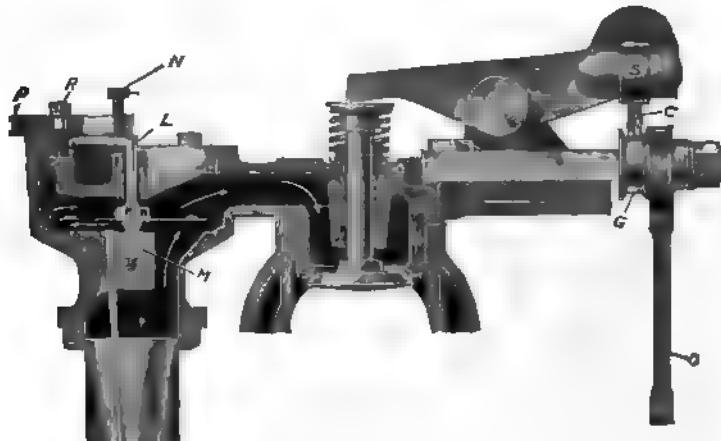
Carburettor and Intake Valve of the Cadillac One-Cylinder Engine. L is the gasoline valve; M, gasoline inlet; N, adjusting screw. A, inlet valve; T, walking-beam for opening it under positive impulse; C, end of eccentric rod, raising T by bearing on roller, S, with roller, G, as fulcrum. O is the handle by which the position of G, consequently the lift of the valve, A, may be varied as desired.
